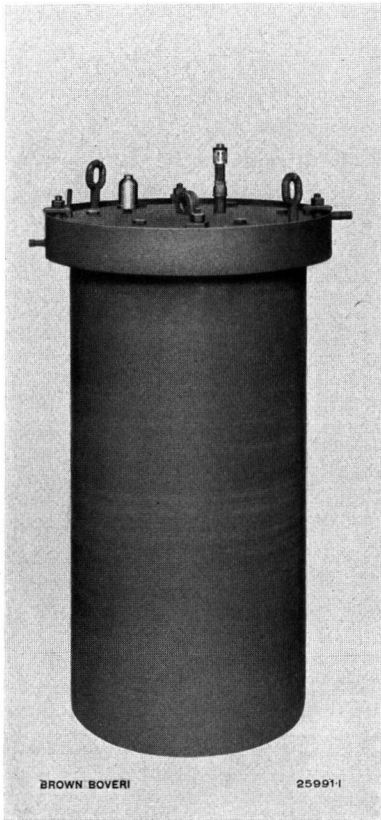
Annealing pot completely assembled and ready for suspending in the furnace.
